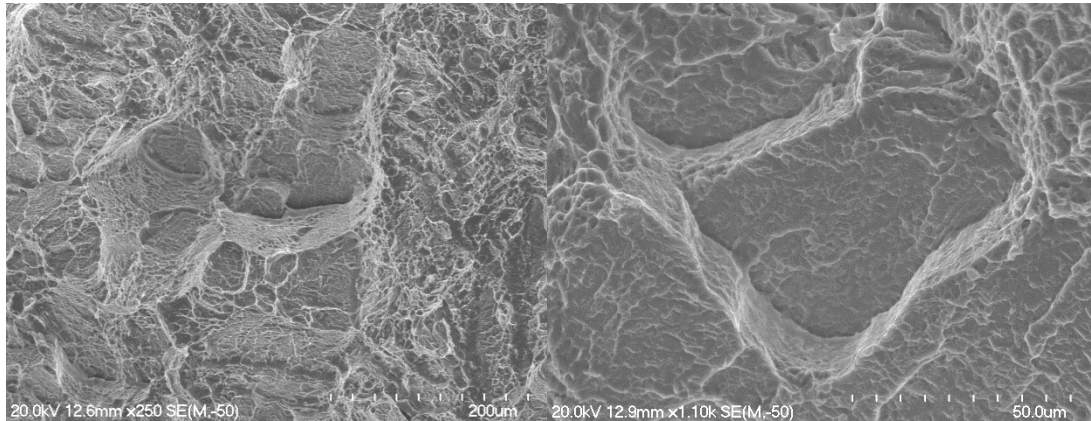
Fracture surface of G1(1250mm/s)
